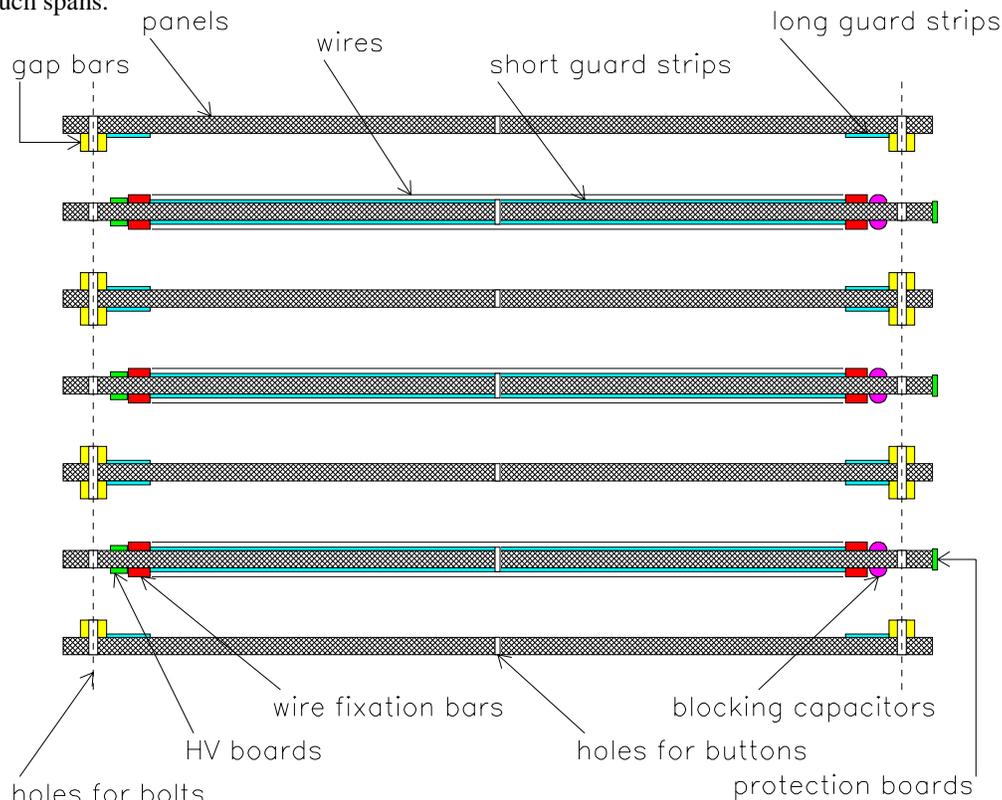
An exploded view of a EMU Cathode Strip Chamber.
